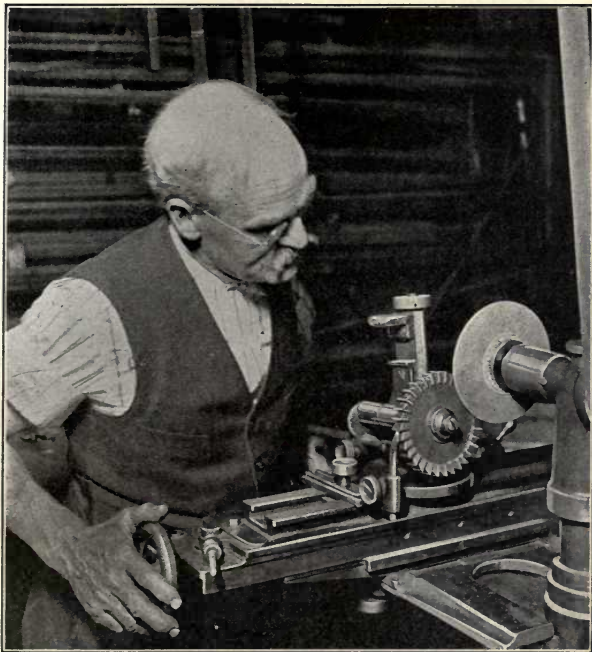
Sharpening the side teeth of a milling cutter on an unguarded wheel.
